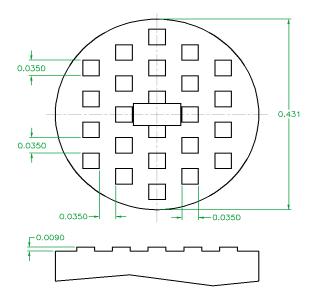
Details of the periodic bandgap array for WR-10 waveguide (0.100" \times 0.050"). Dimensions are in inches. The array is machined on only one side of the gap, the opposing flange being of the same diameter but flat.
